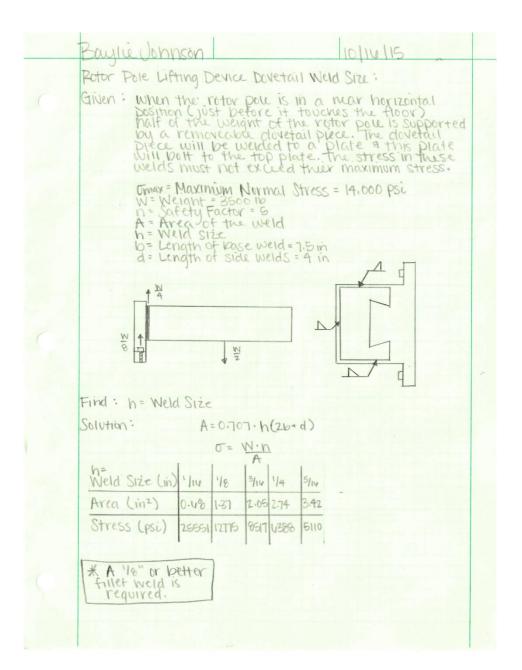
DETERMINING THE WELD SIZE ON THE REMOVABLE DOVETAIL.
